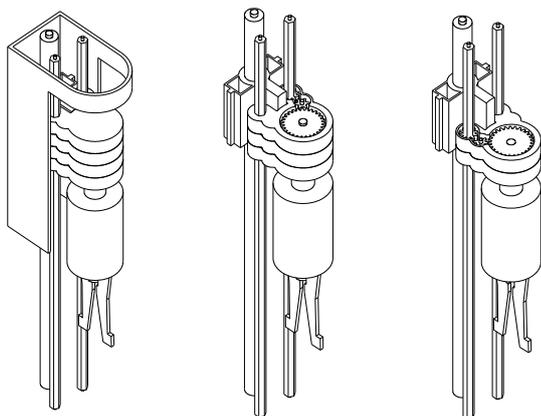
Driving mechanism of the PGSFR gripper assembly
